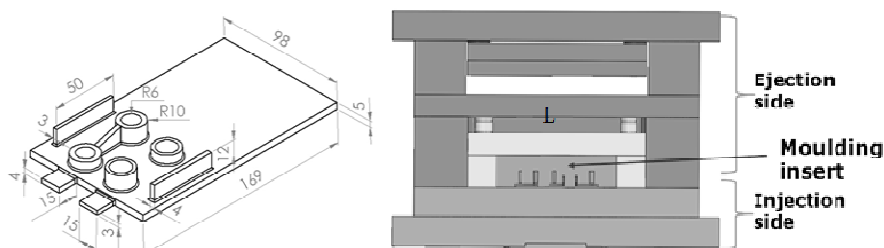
Geometry and main dimensions of the plastics part (left), structure of the corresponding hybrid mould (right)
